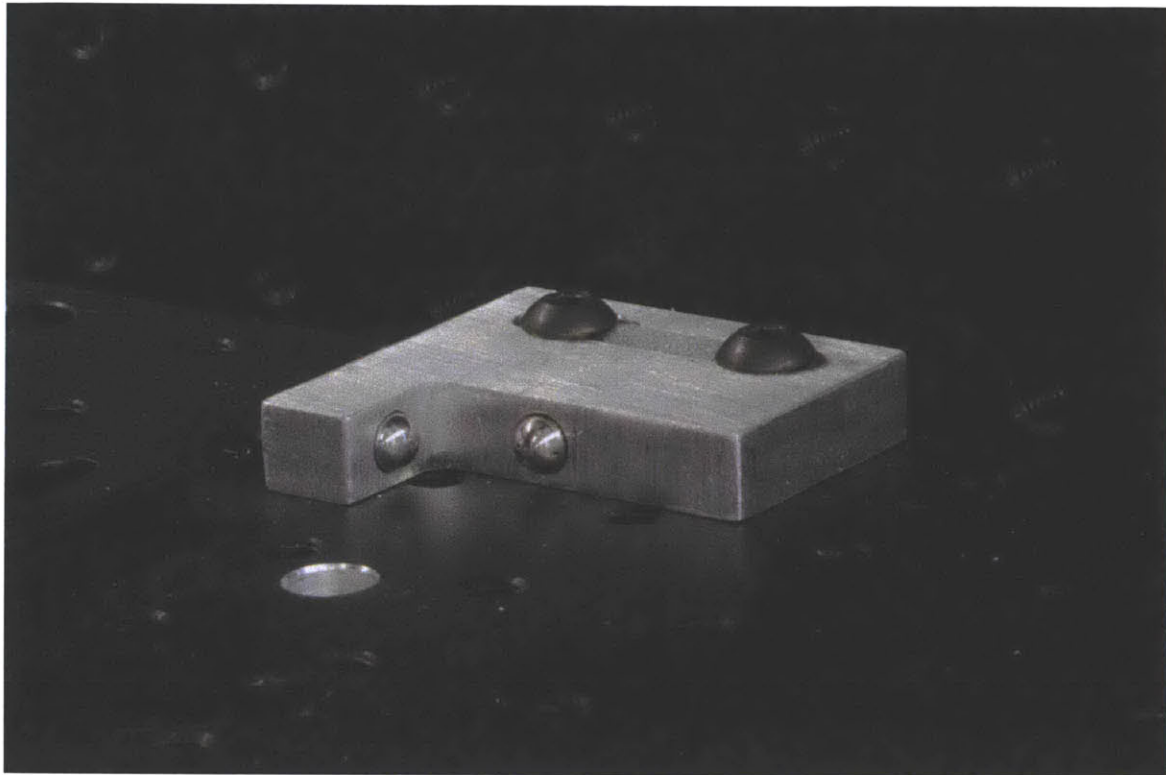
One of the kinematic hard stops used to for the repeatable positioning and alignment of the print head assembly
